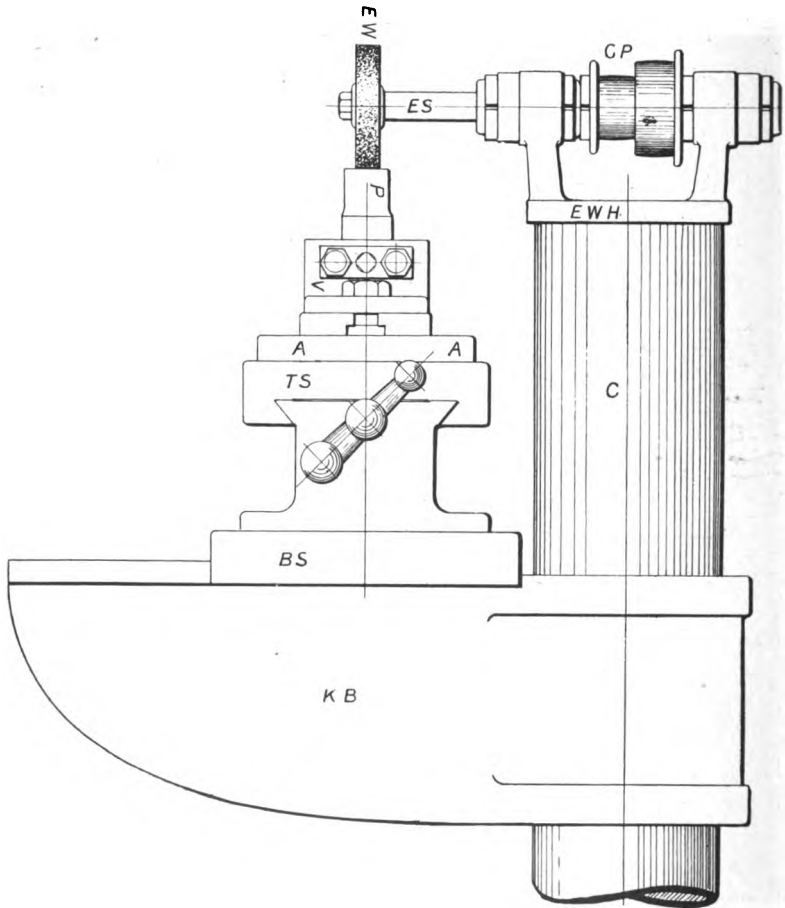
End Elevation of "Ward" Machine operating as shown in fig. 112.
